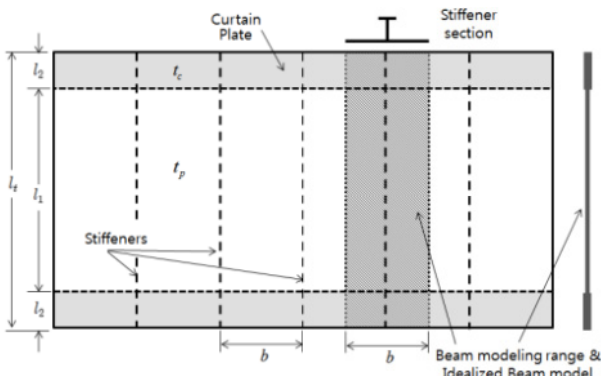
Arrangement of curtain plate reinforced BHB and beam modeling
